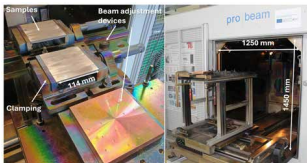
Test setup: Left: Clamping of the sample sheets; Right: View into the vacuum chamber of the K30 (© Fraunhofer IPA)
